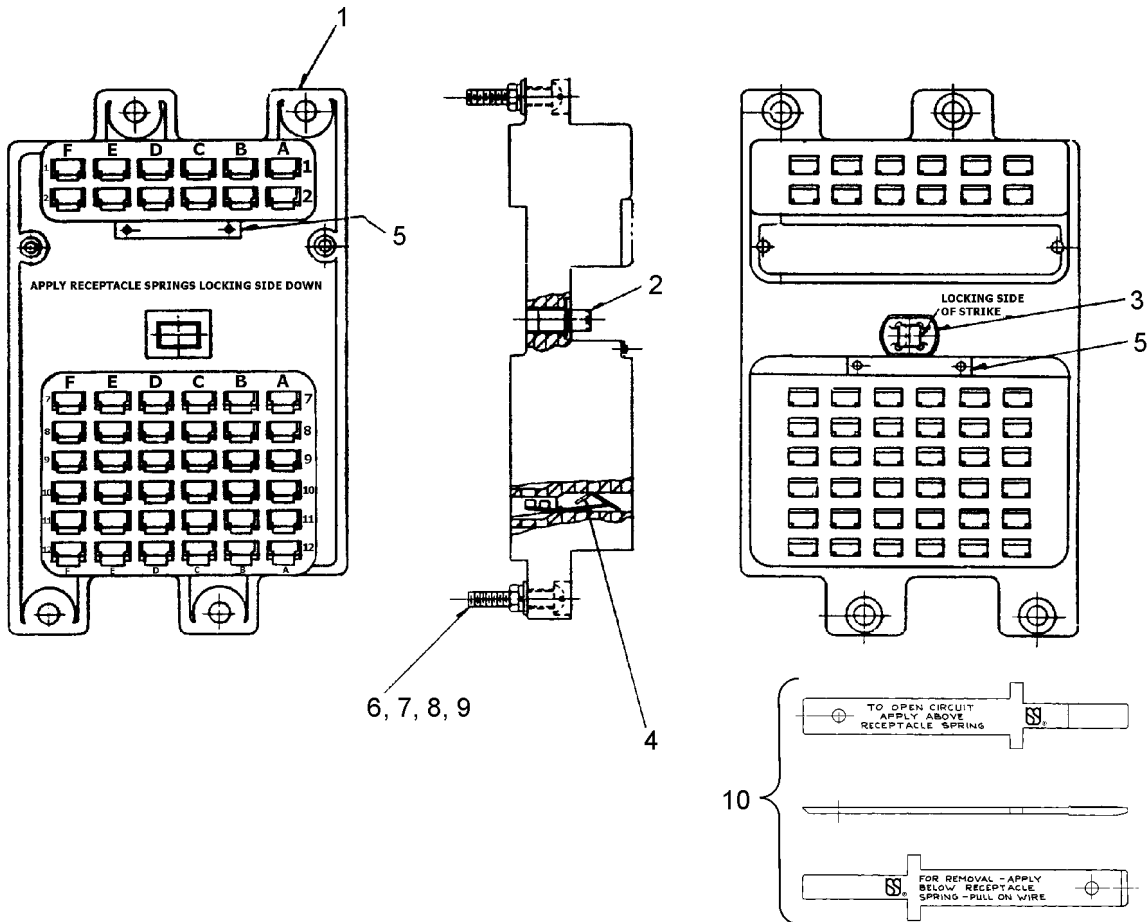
New Style Mounting Base Assembly (N438689-003)
